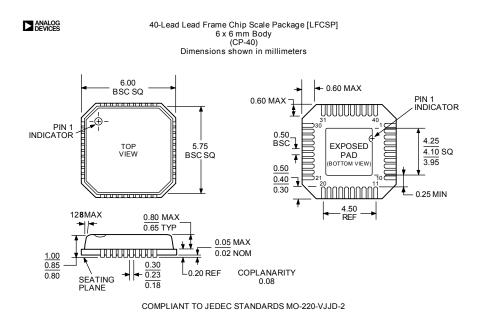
40-Lead Frame Chip Scale Package [LFCSP] (CP-40)—Dimensions shown in millimetres
